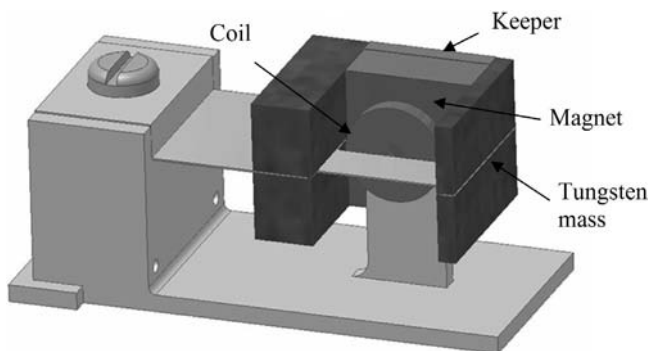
Cutaway (two magnets and keeper removed) of the mini-sized generator design.
